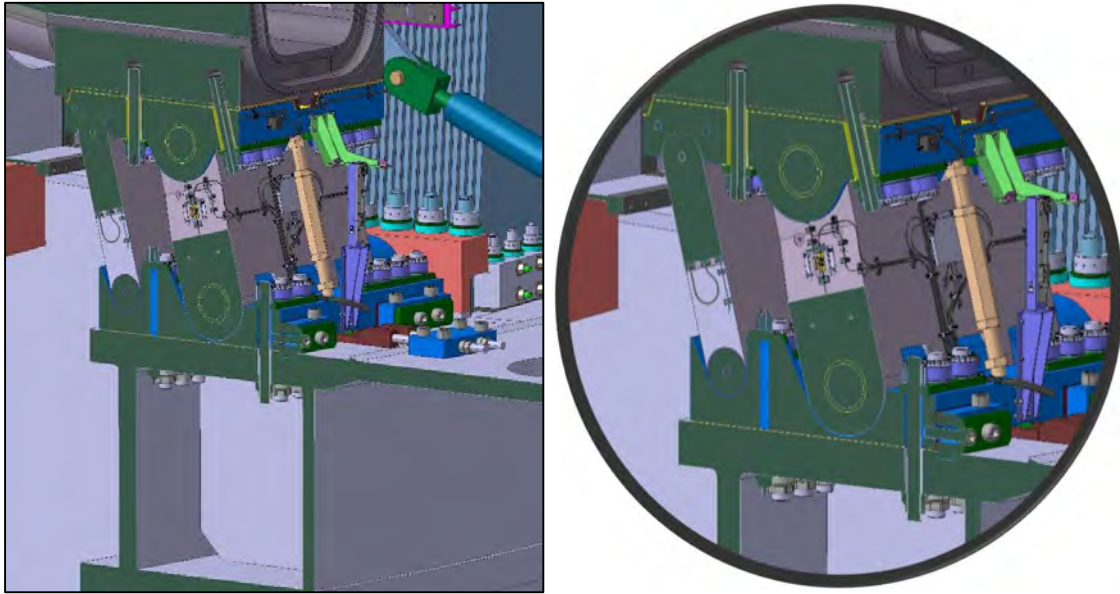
VVGS Section Cut with M72 Super Bolts
